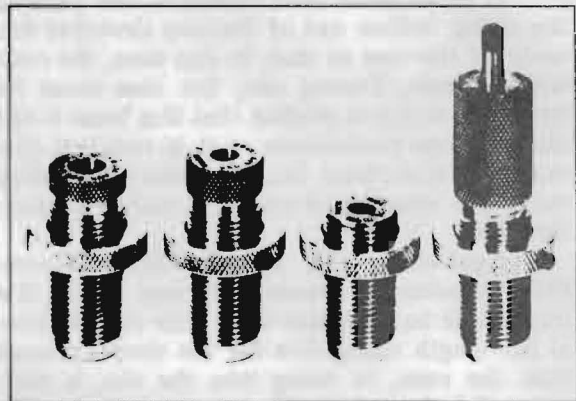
Typical case-forming die set. The die at the right is a conventional sizer, used for final sizing and reloading the previously reworked brass.
